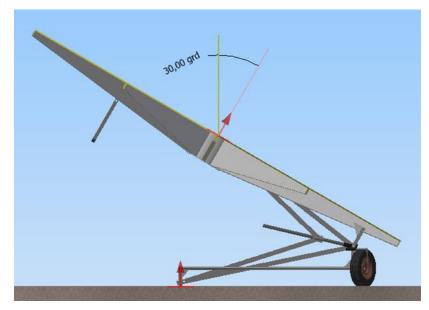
Scissor mechanism as elevation drive at 30° elevation angle
